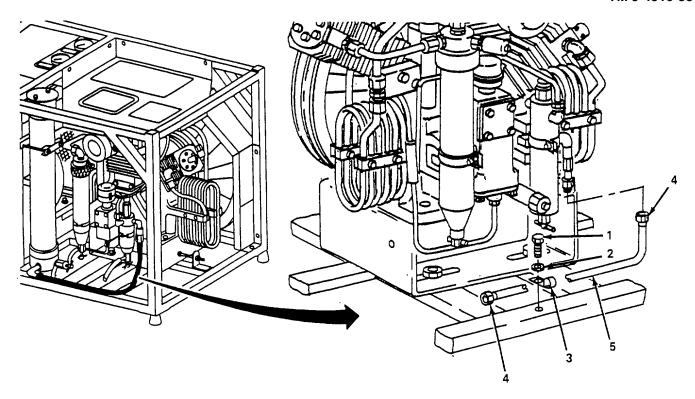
Final Separator to Purifier Assembly Line, Replace.
